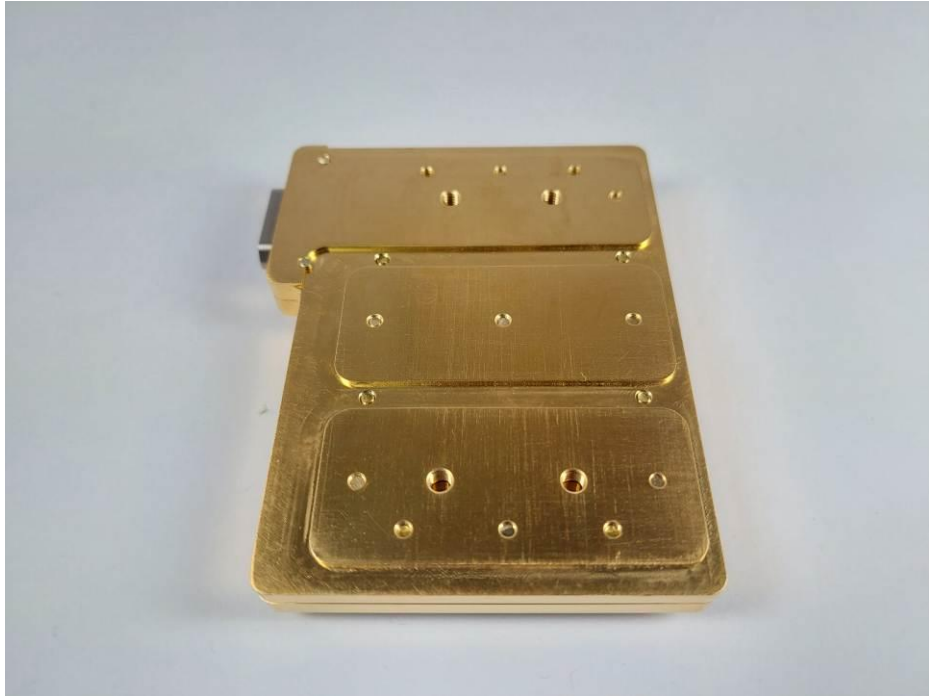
Four threaded M4 mounting holes in grid 20 mm x 60 mm.
